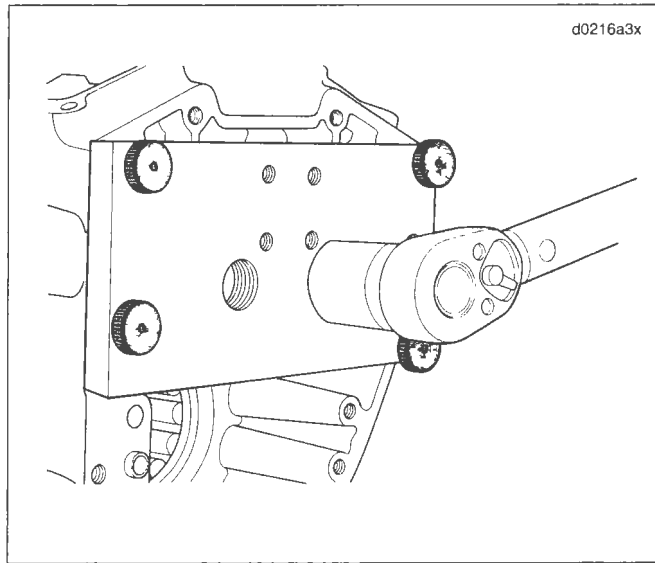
1 Inch (25.4 mm) Bearing Installation
